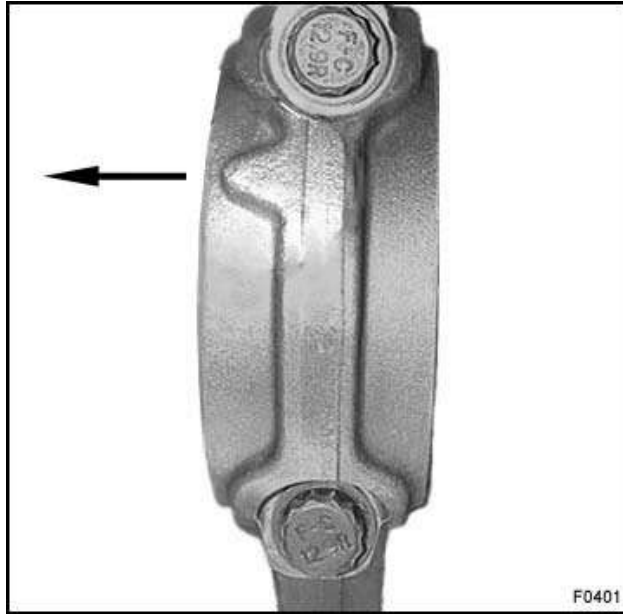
Connecting rod cap with M12 connecting rod cap bolts (protrusion points to front of engine)
